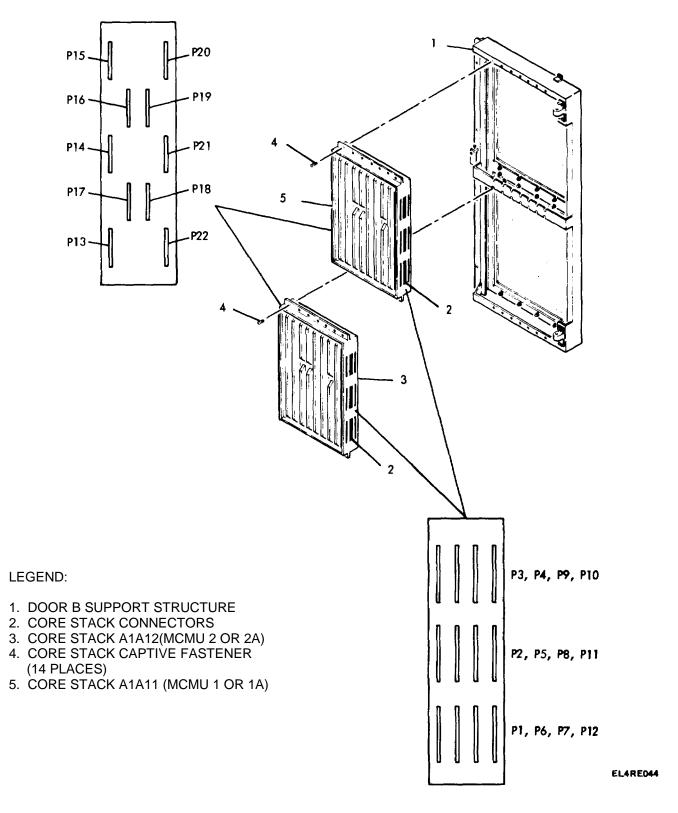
MCMU Core Stack A1A11 and A1A12) Assembly Removal and Replacement
